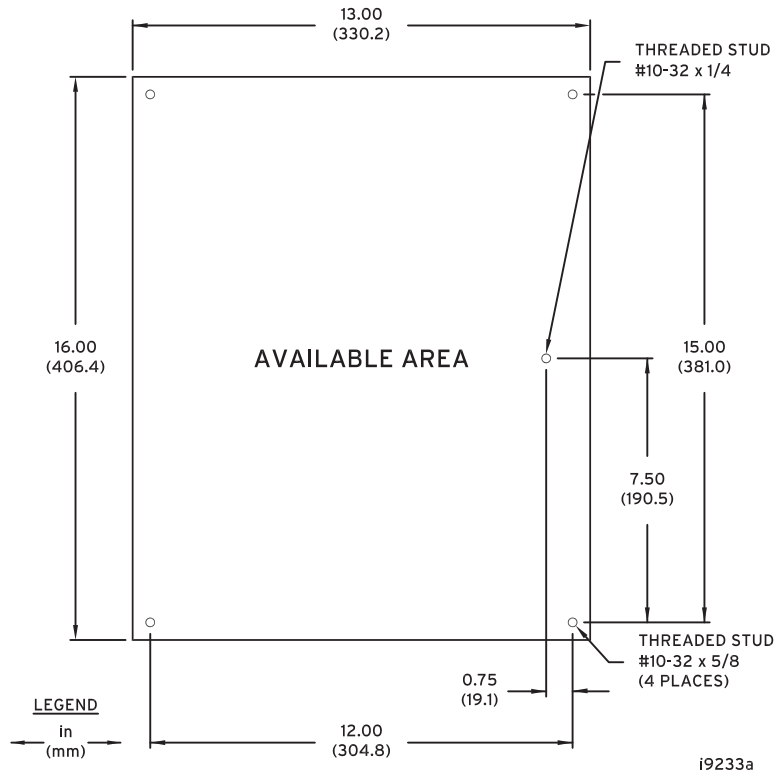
Recommended Dimensions and Drill Plan for User-Supplied Accessory Panel (Swing-Open Enclosure)
